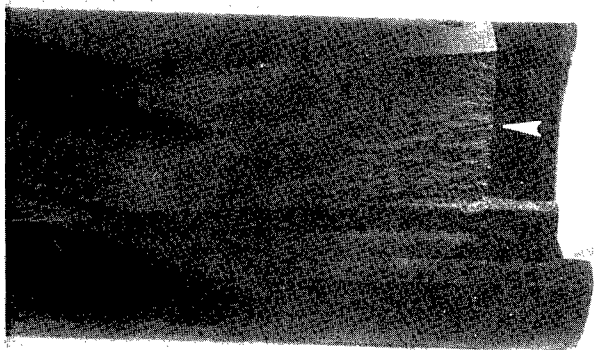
Arrow shows fracture origin at corner of keyway. Mag: 1.2x
